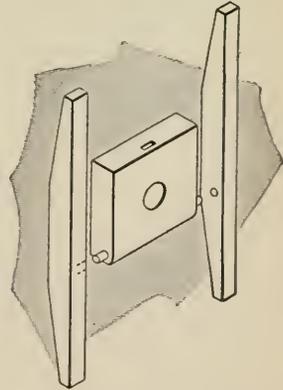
The three parts that are necessary to mount the table if the top is to tilt.
